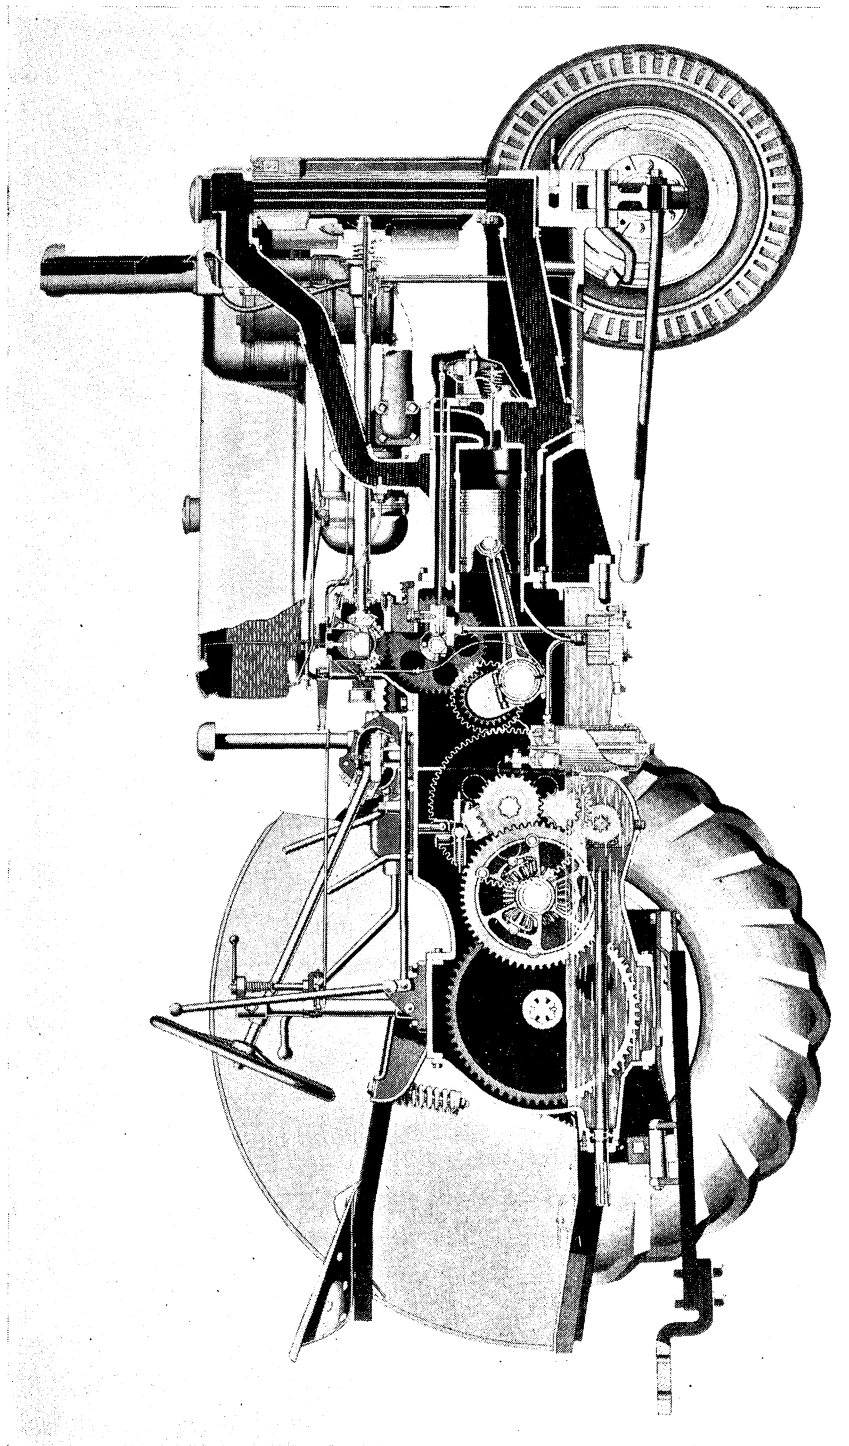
Cross-Sectional View of John Deere Model "AR" Tractor
